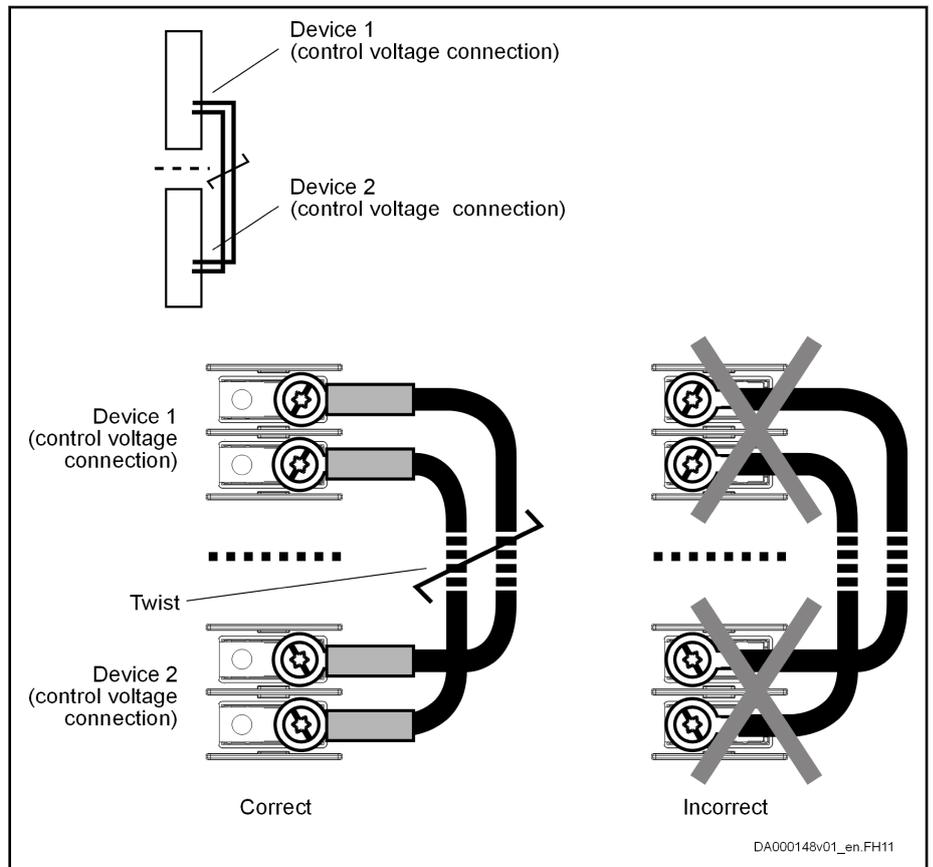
Control Voltage Connections for Cable Routing to the Right
